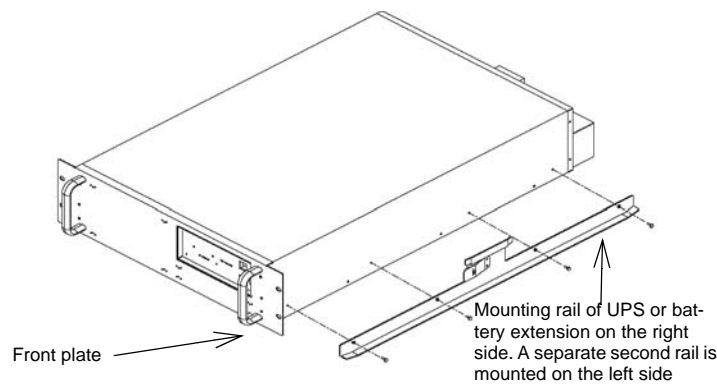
Mounting the rails to the body of the UPS or battery extension
